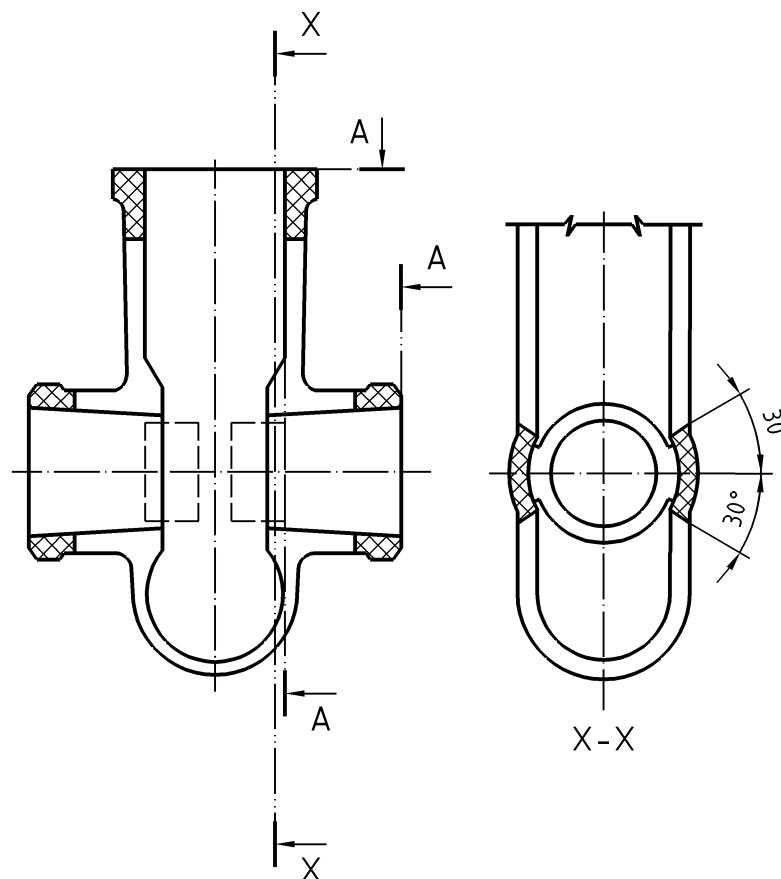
Typical casting section showing required radiographic examination of conduit gate valve body (pressure seal bonnet)
